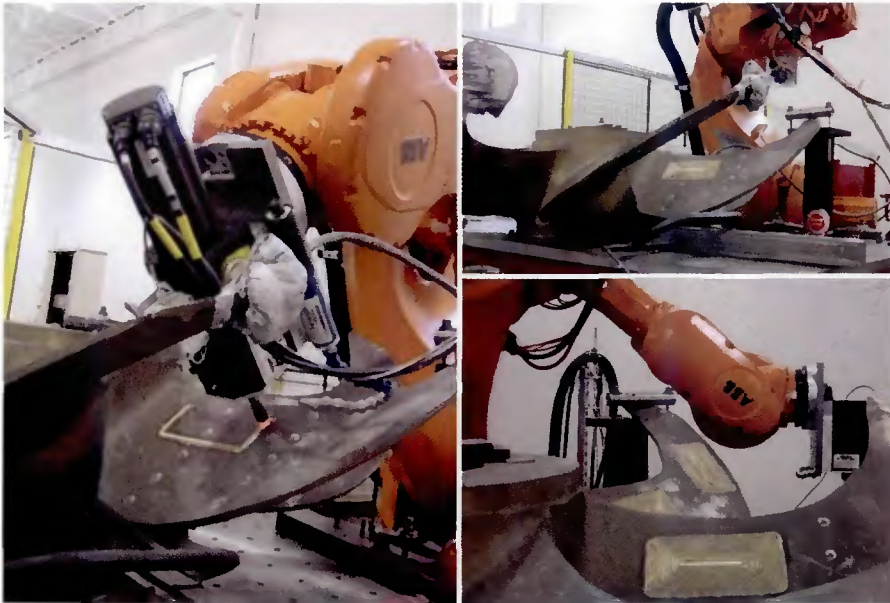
Friction Stir Link, Inc., robotic FSW system processing large areas of NiAl bronze propellers to remove near-surface casting defects. Courtesy of Rockwell Scientific.
